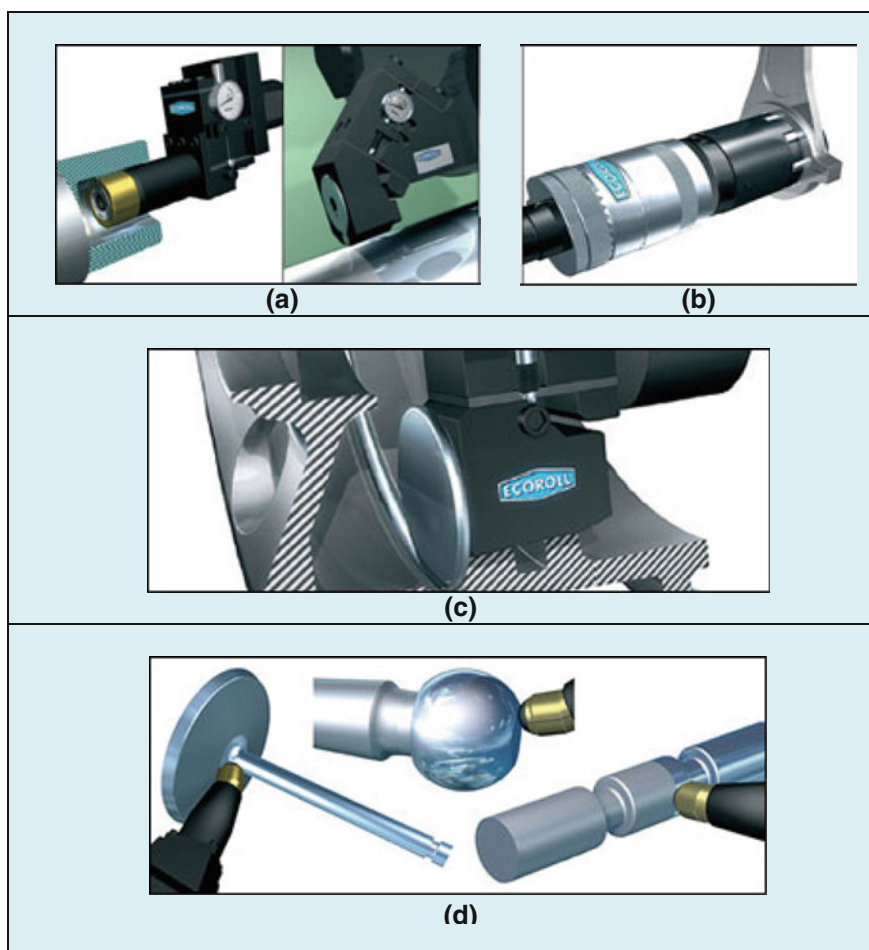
Tools for cold working operations: a single-roller mechanical tools, b multi-roller mechanical tool, c deep rolling tool, d burnishing tools [2]
